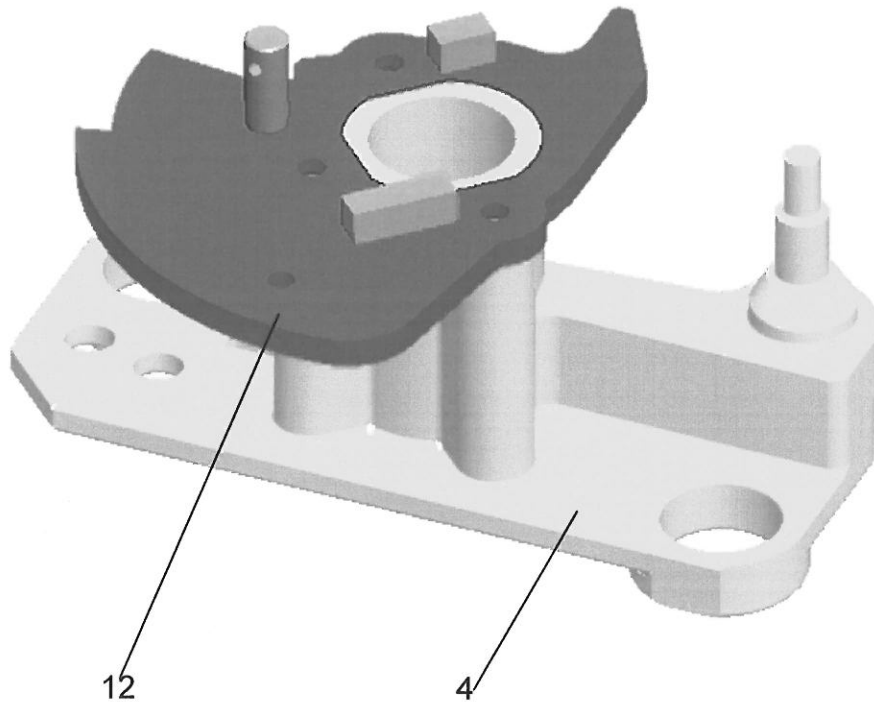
New cam 12 with anti-rotational keys temporarily installed on the top of the hub of the base 4 to determine which cam (“A” or “B” in assembly 50530211-04; and “C” or “D” in assembly 50530211-02 respectively) should be used to retrofit the teeter lever assembly. Note that the cam is shown inverted from the normal position.
